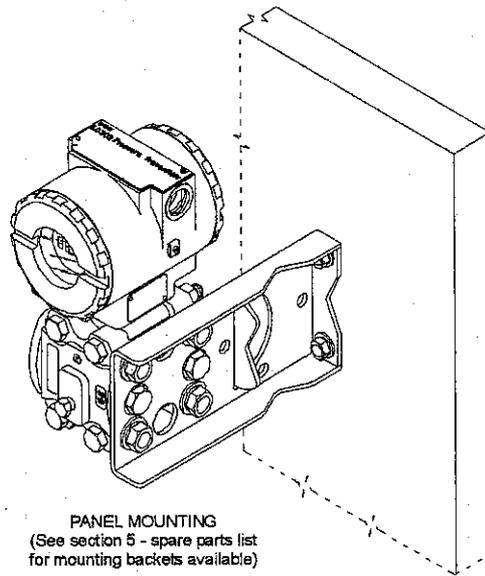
Dimensional Drawing and Mounting Position for LD302
